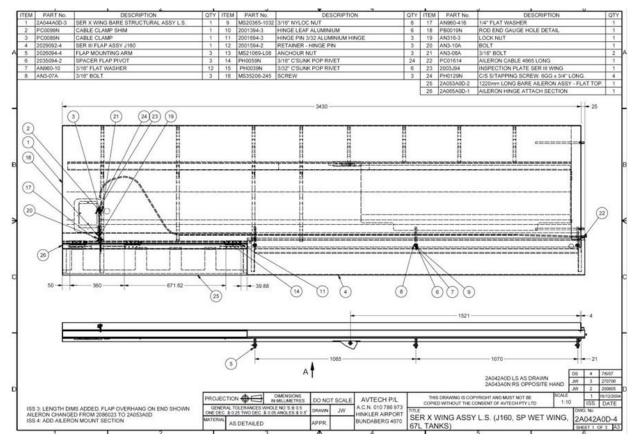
J160 Wing Assembly Sheet 1, Ser X (J160)
